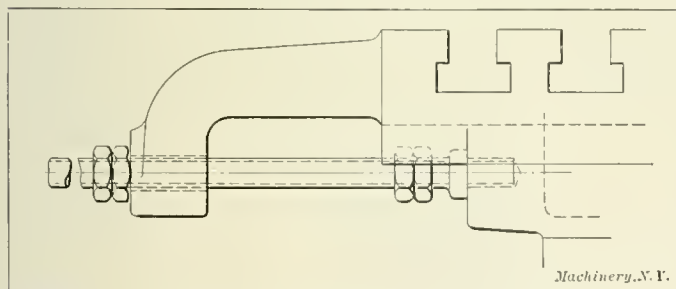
Efficient Type of Stop-rod for Turret Lathe Cross-slide
